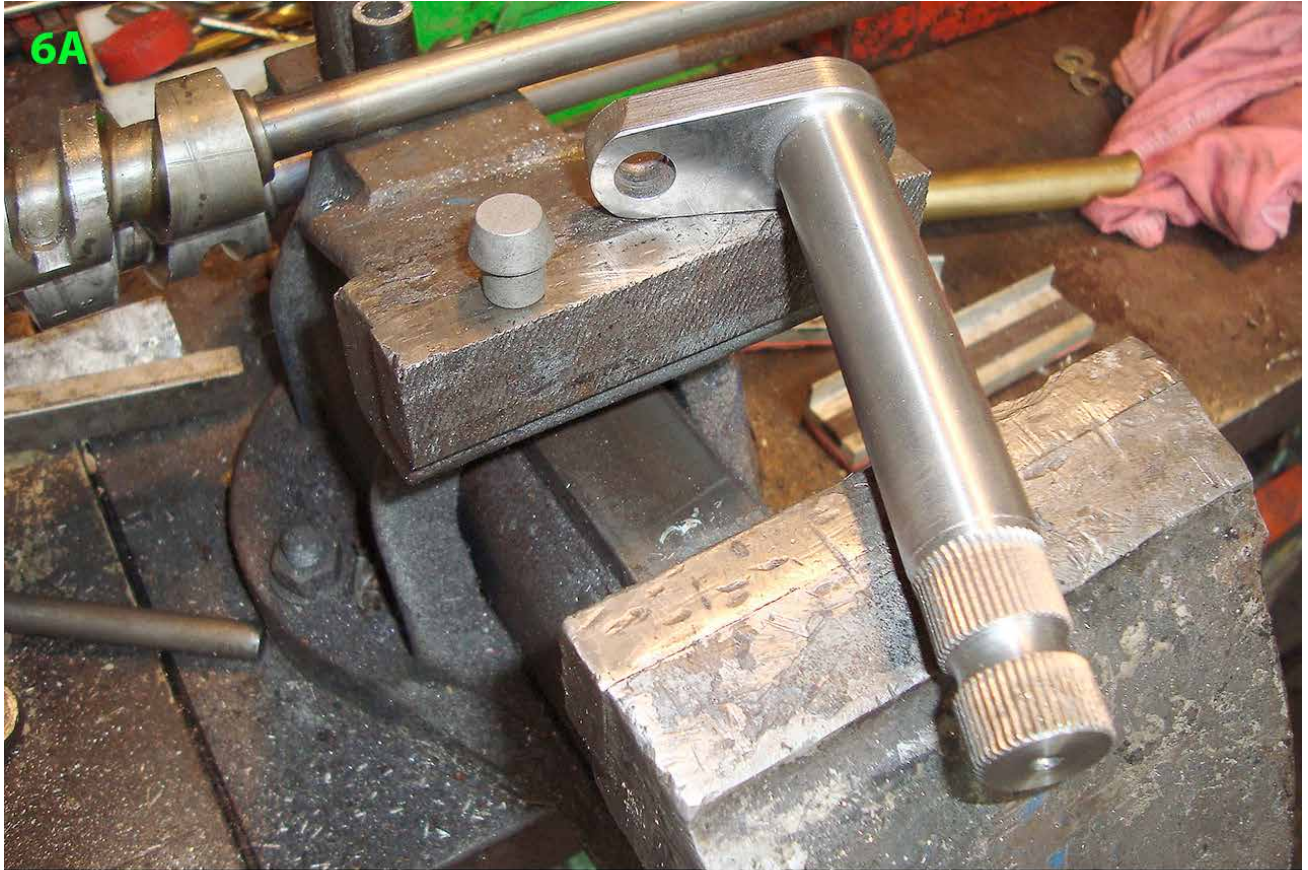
Shows the new sector shaft finally located for test fit after reaming.
